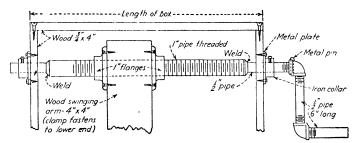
Detail drawing of pipe assembly used in making sawing outfit shown in Fig. 128.
